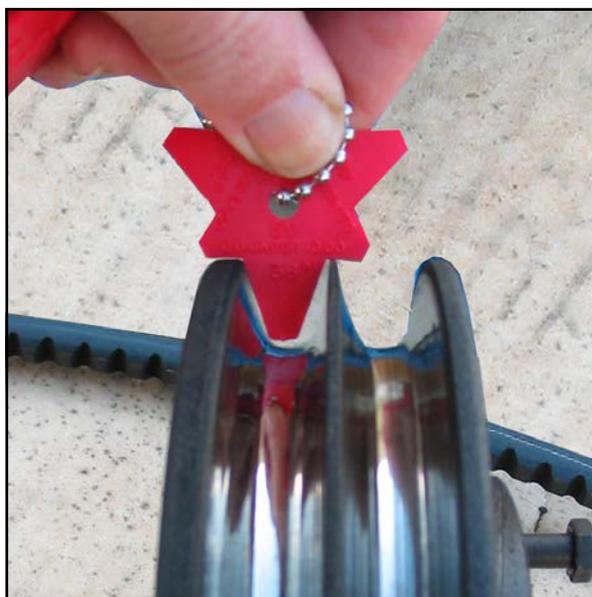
This photo depicts a highly worn sheave, which can cause belt sidewalls to harden and crack, or produce excessive wear on the belt's bottom surface and corners, leading to premature belt failure. In an unworn sheave, the gauge should fit snugly into the groove with no light shining through.
